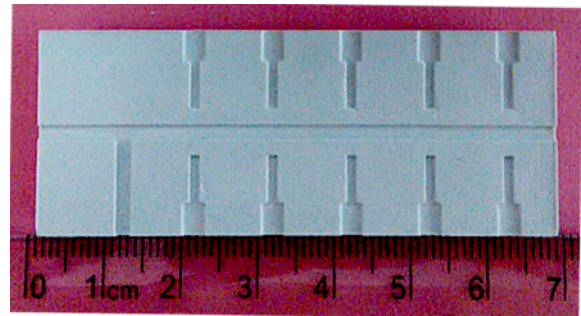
Structured green body manufactured via injection moulding using a 3D printed mould insert made of VeroClear RGD 810.
